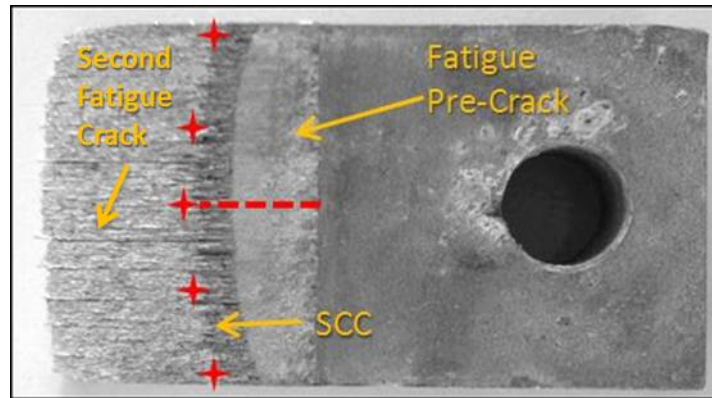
Final stress corrosion crack length measurement locations for DCB samples
